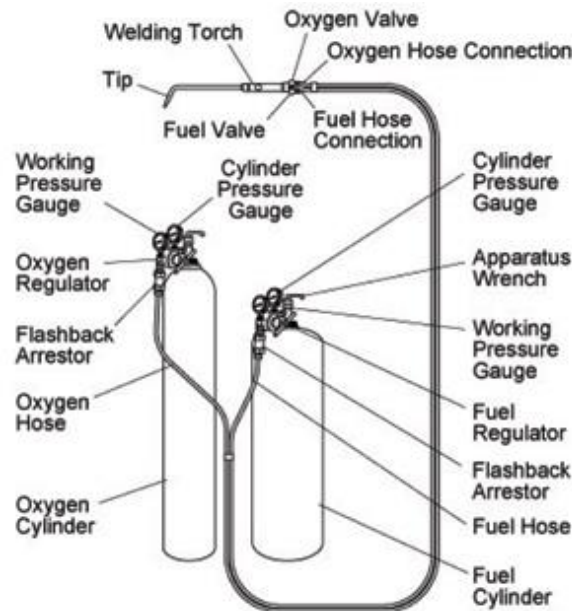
Oxy-Acetylene Gas welding equipment
